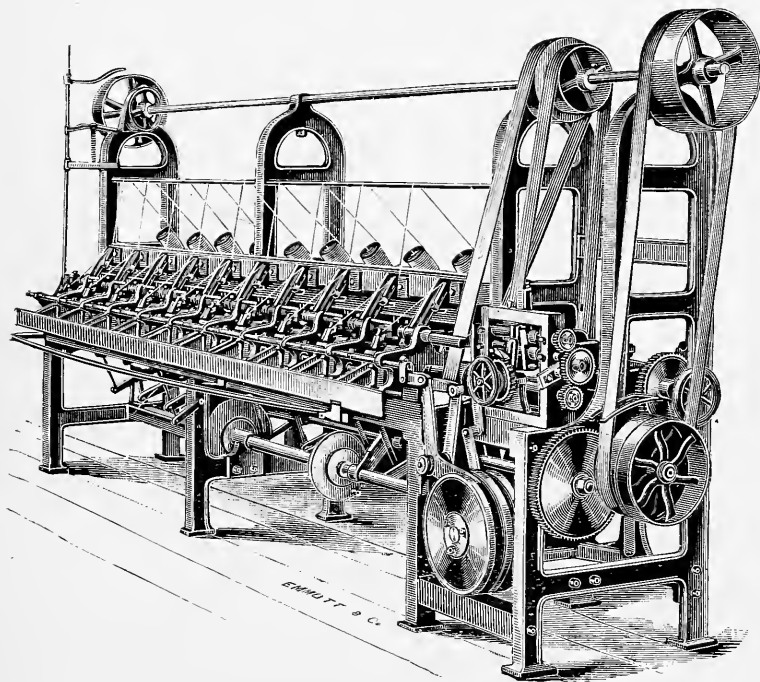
Improved self-acting spooling machine (Weild's principle).
